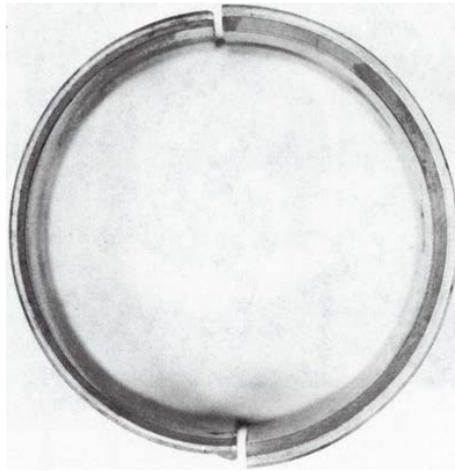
Thin wall bearing on left, heavy wall bearing on right.
